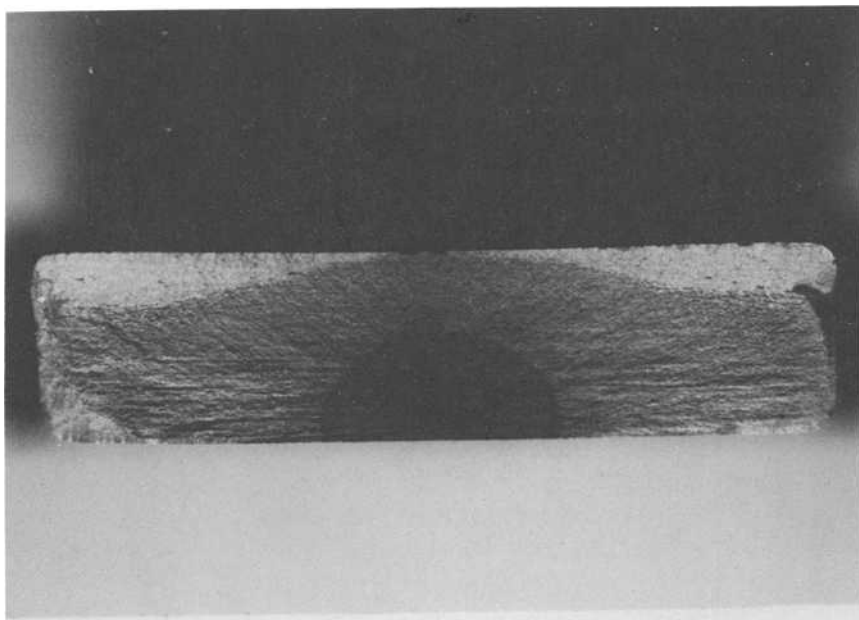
Cross-section of failed surface-crack specimen showing heat-tinted crack shapes.
